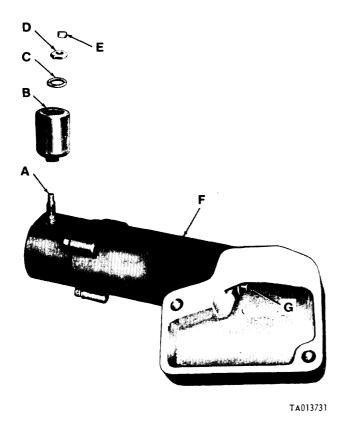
Fuel shutoff solenoid cover (code A pumps), partial exploded view.
